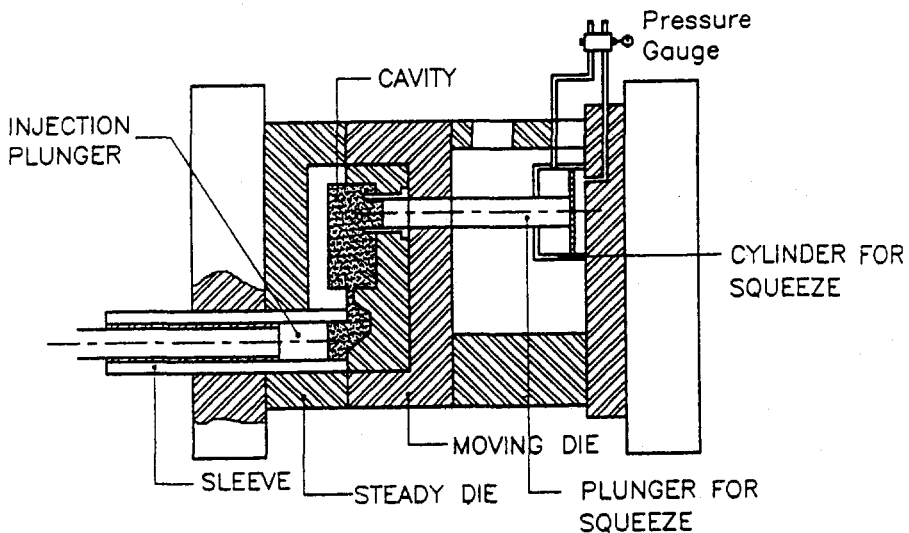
Cross sectional view of partial squeeze die casting machine.
